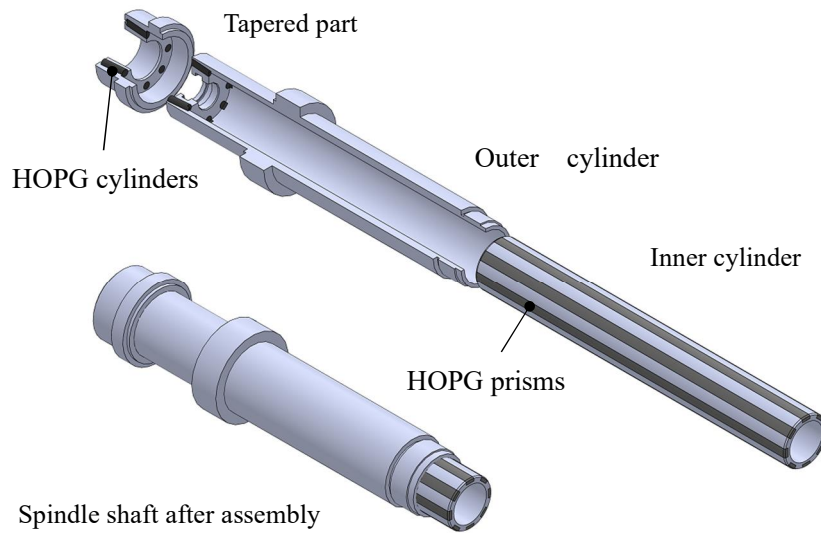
Visual indication of a spindle shaft in which HOPG is bonded to carbon steel.
